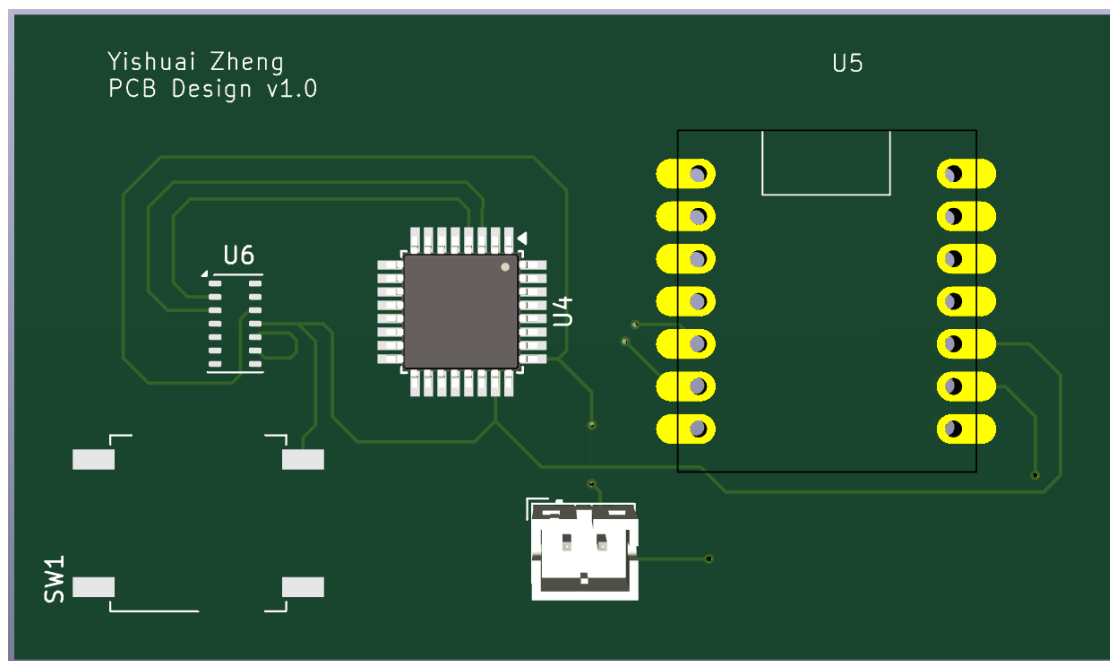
PCB Editor Circuit Board in KiCAD (3D View)
